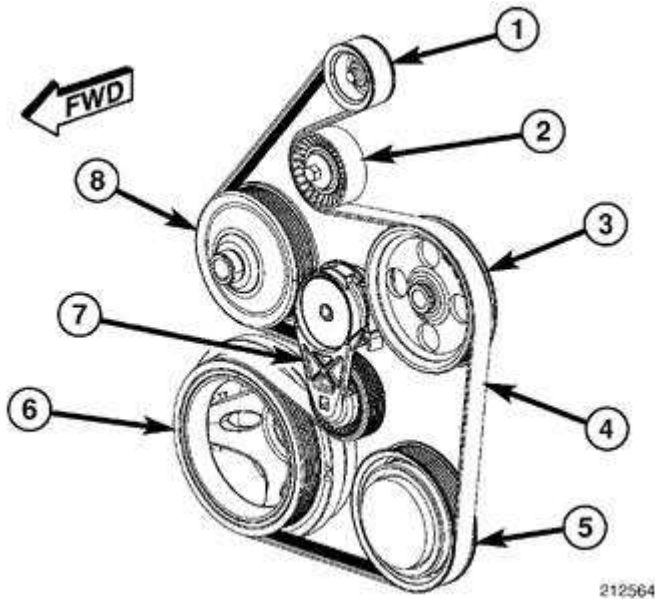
Identifying Accessory Drive Belt Routing - 5.7L
